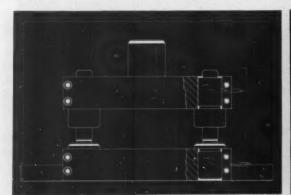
Leader pins and guide bushings are assembled in this die set by slotting the die-shoe and punchholder, and clamping with screws.
